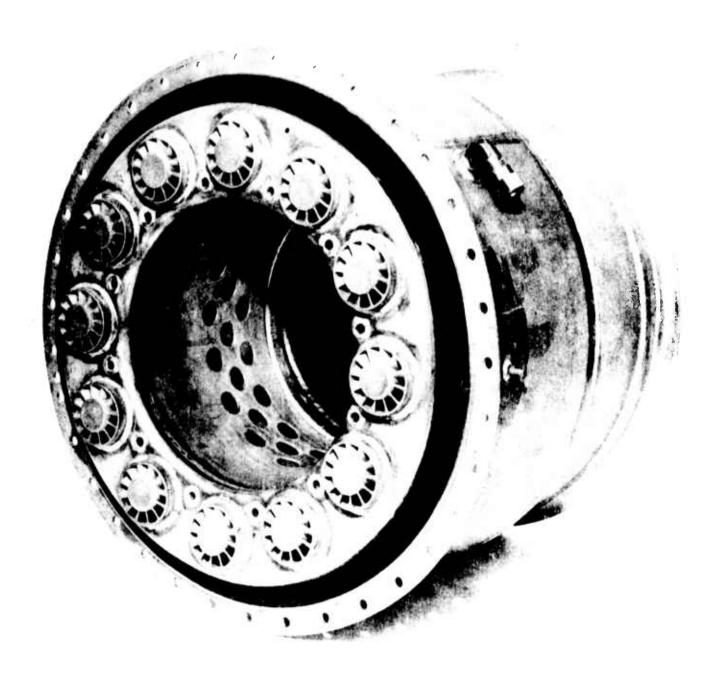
Combustor and Turbine Nozzle Assembly (Forward View). The Improved Combustor is Shown in Figure 52.
